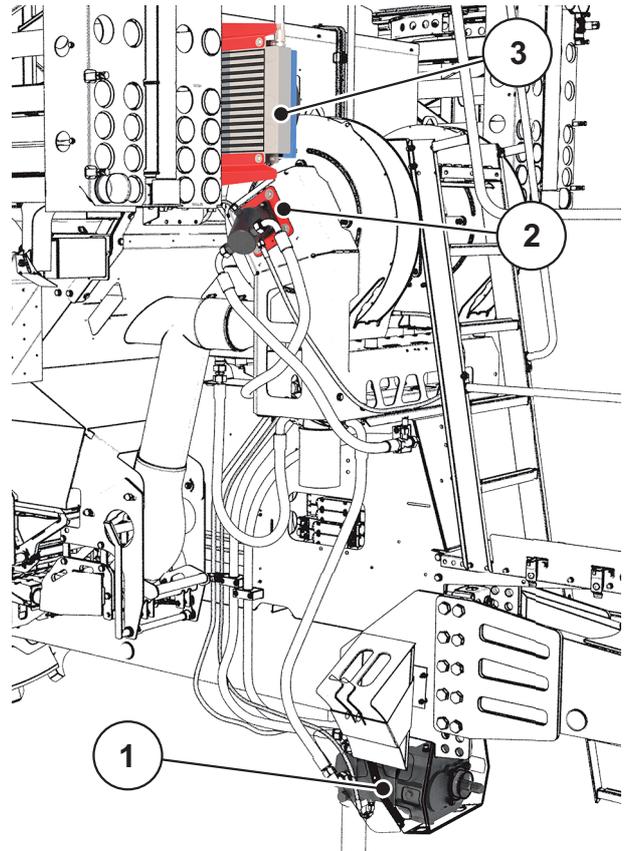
Checking the axial piston pump, axial piston motor and oil cooler
